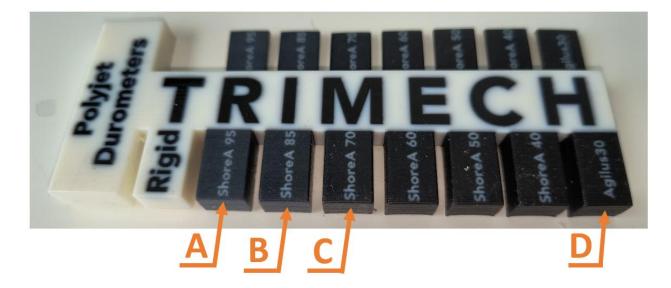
A sample piece has different Polyjet machine shore values that TriMech can afford.
